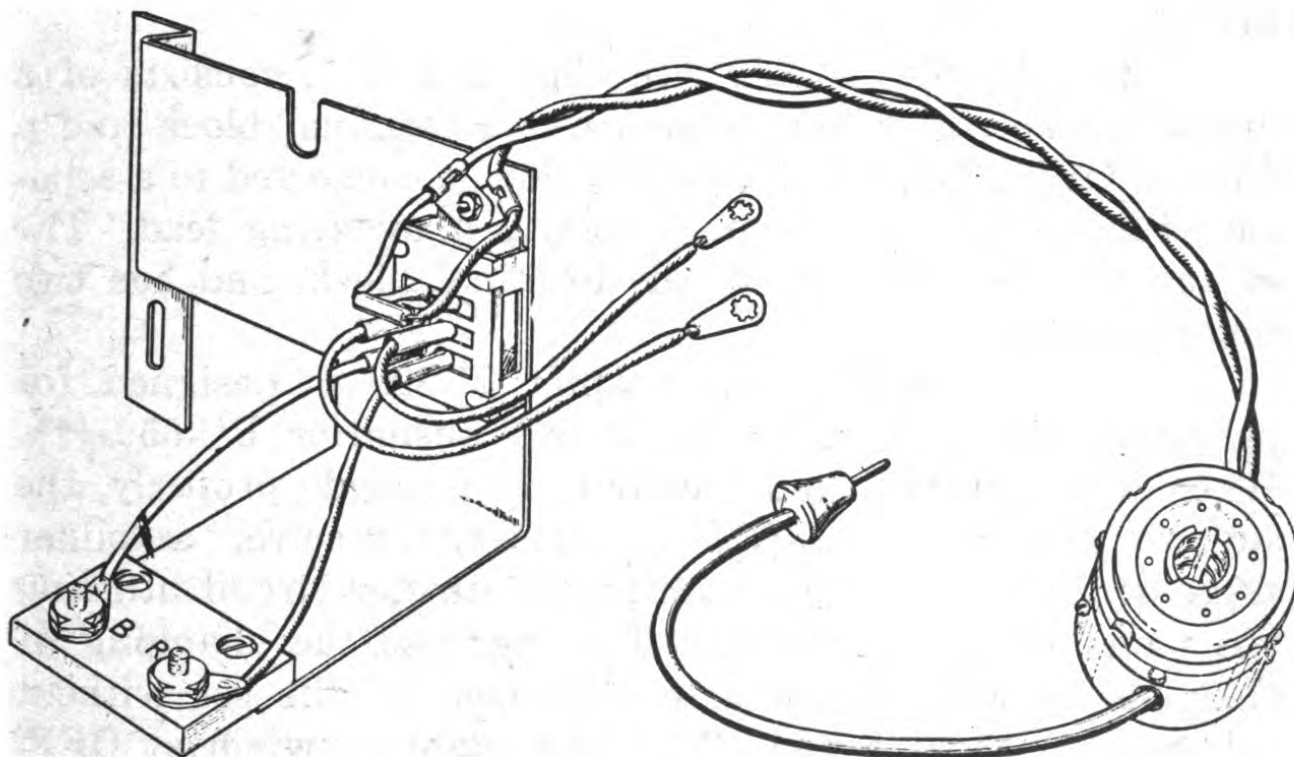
ADAPTER M-394, BOTTOM VIEW
